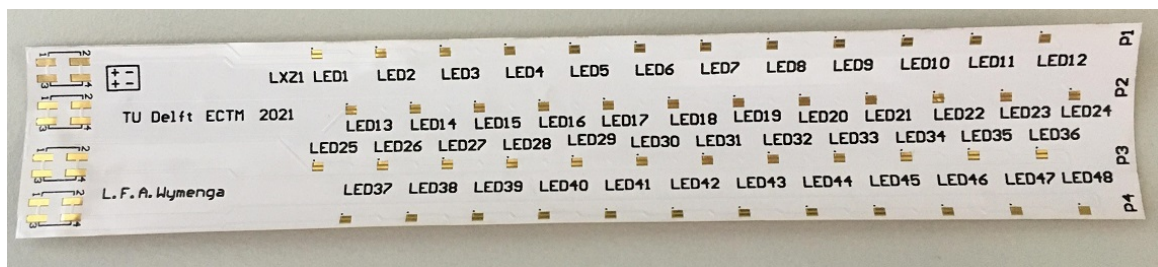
Flexible one-layer LED sheet design, with room for four 4-pin SMT connectors and 48 miniLEDs. Surface finish is made of immersion gold.
